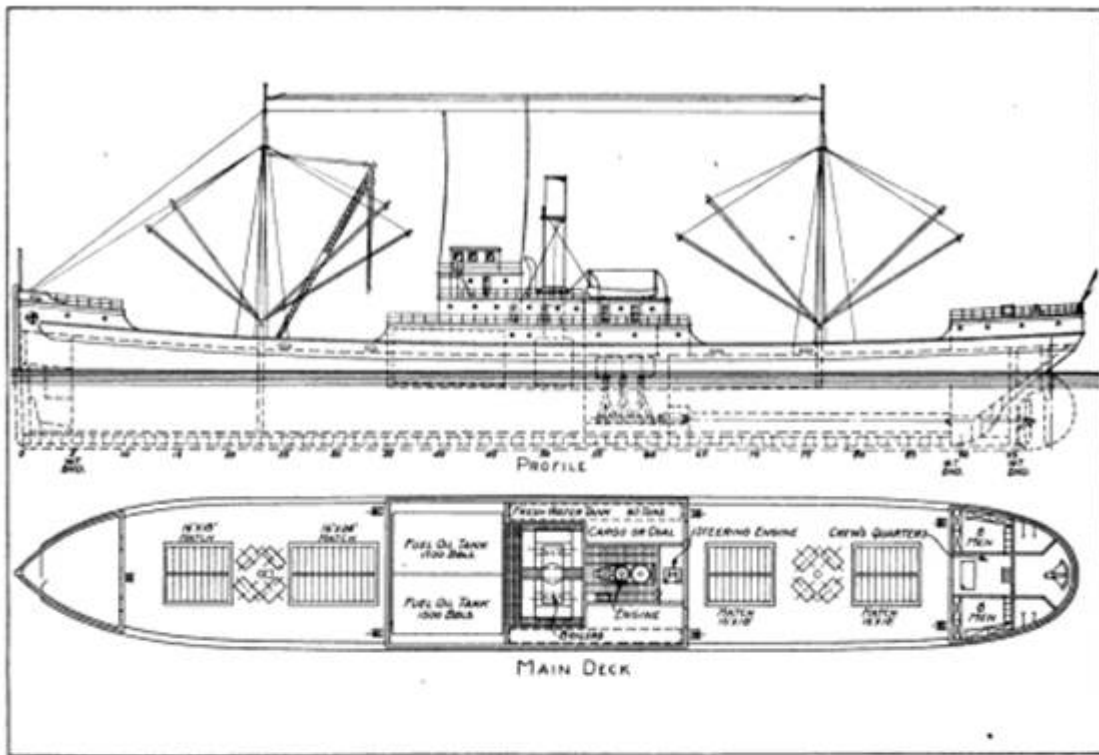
OUTBOARD PROFILE AND DECK PLAN OF A TYPICAL 400-TON WOODEN STEAMSHIP
